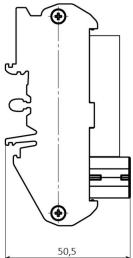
Dimensions of stepper motor driver SMD-8.0 carrier kit version
